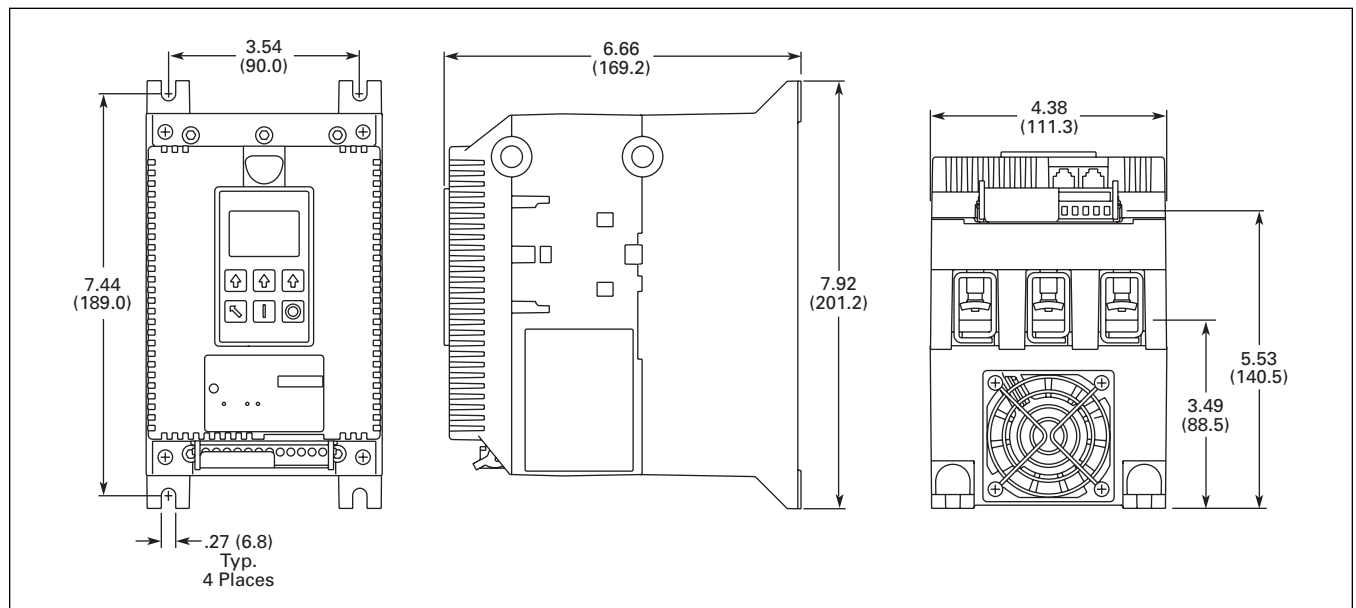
R-Frame (110 mm) S811 Approximate Dimensions in Inches (mm)
